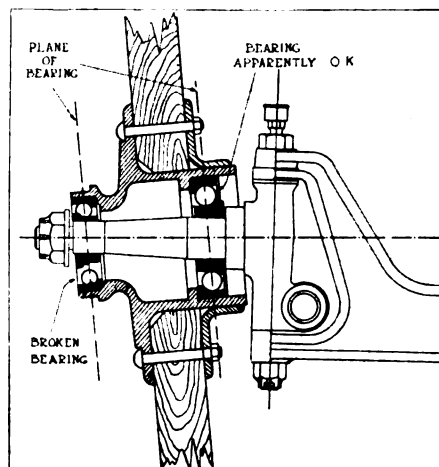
Diagram showing how the destruction of outer bearing throws tremendous strain on inner bearing
